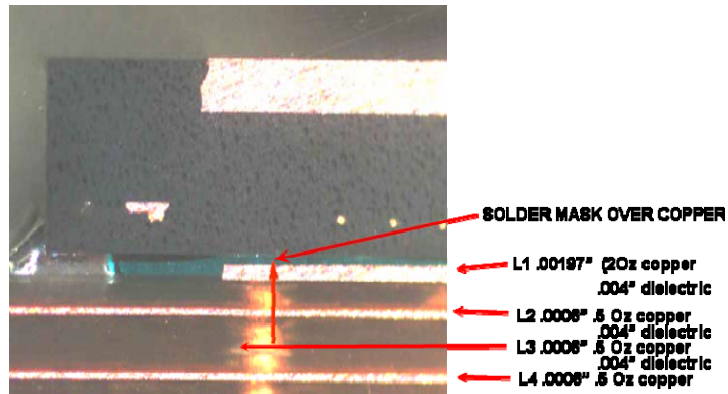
Cross sectional view of a QFN mounted to a printed circuit board
